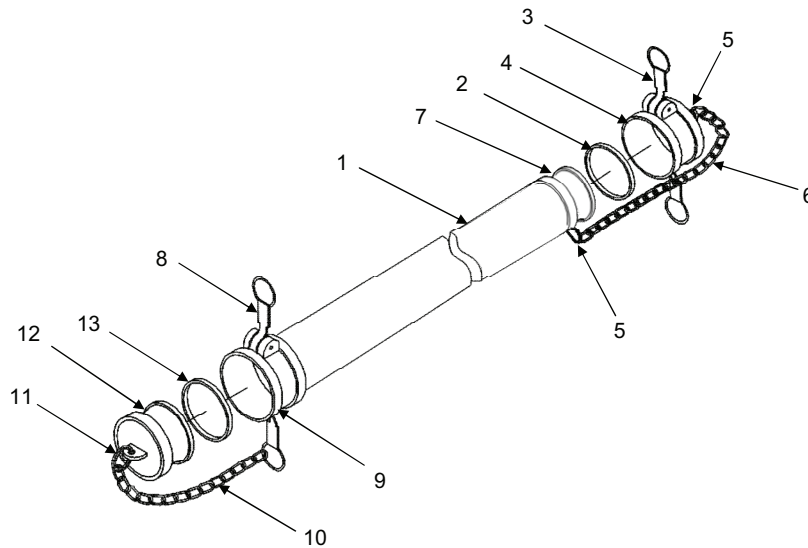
Tank Drain Hose Assembly, Cam X Cam.
